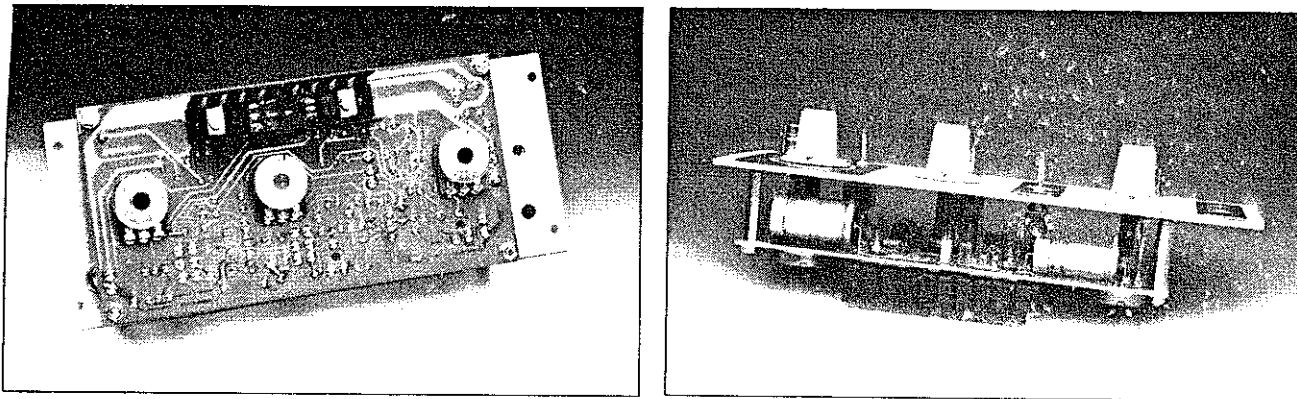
Completed PCB-front panel assembly seen from the PCB track side (left) and from the side (right).
